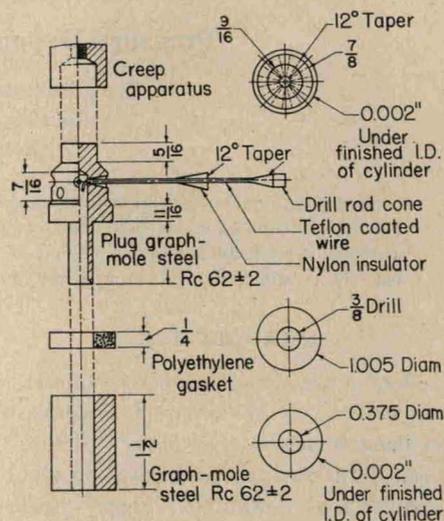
High-pressure plug with 8 electrical leads (dimensions are in inches).
